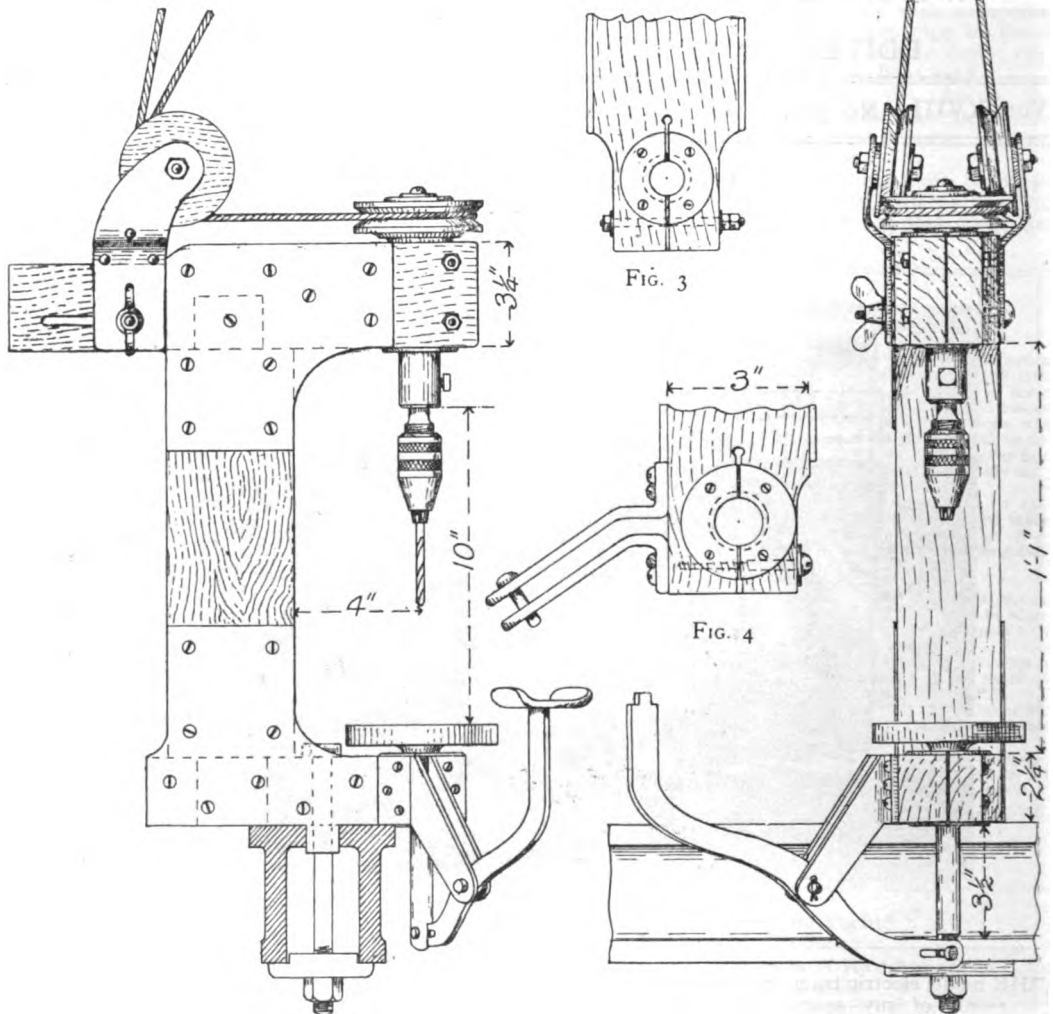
SIDE ELEVATION OF SENSITIVE DRILLING MACHINE.
